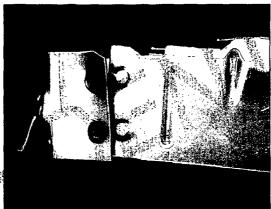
Image of a magazine box which did fail the welds during the weld strength testing. Note the partial failure of the material at the front of the box as well.
